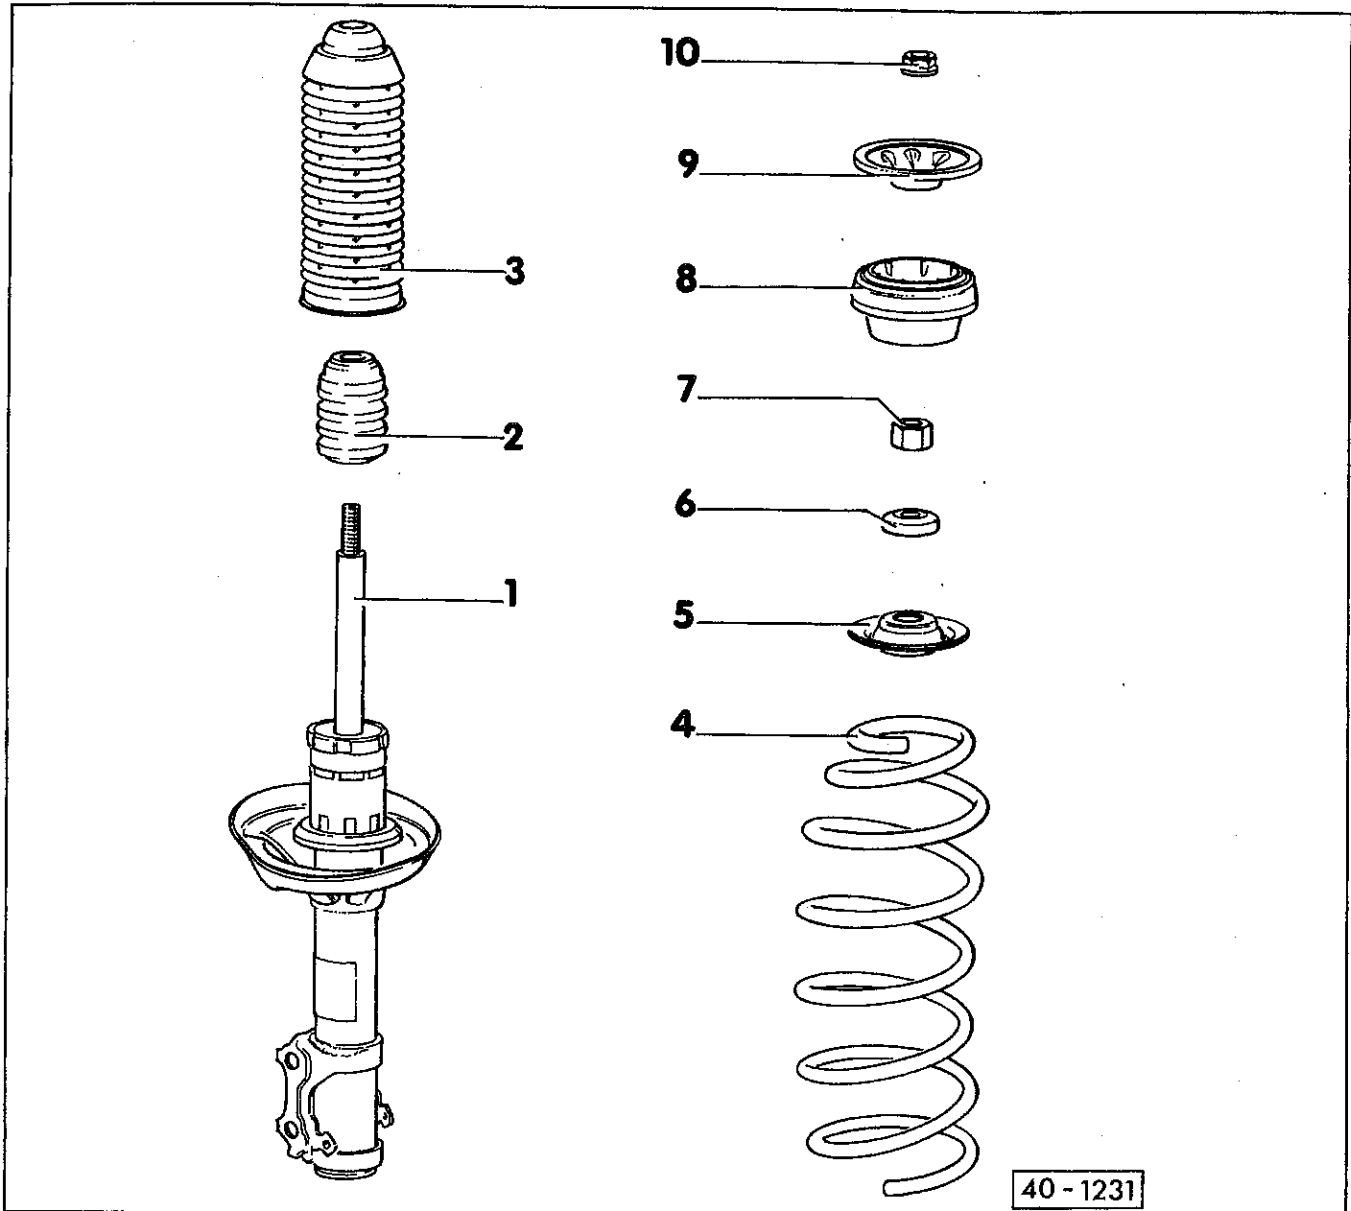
Exploded view of front strut assembly used on cars with plus suspension.
